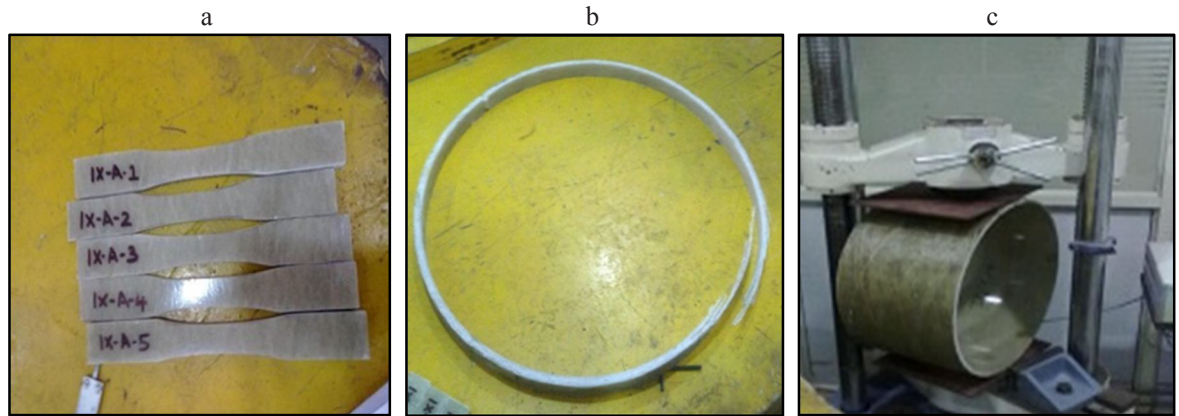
(a) Axial specimen; (b) Hoop specimen-fractured; (c) Stiffness testing.
